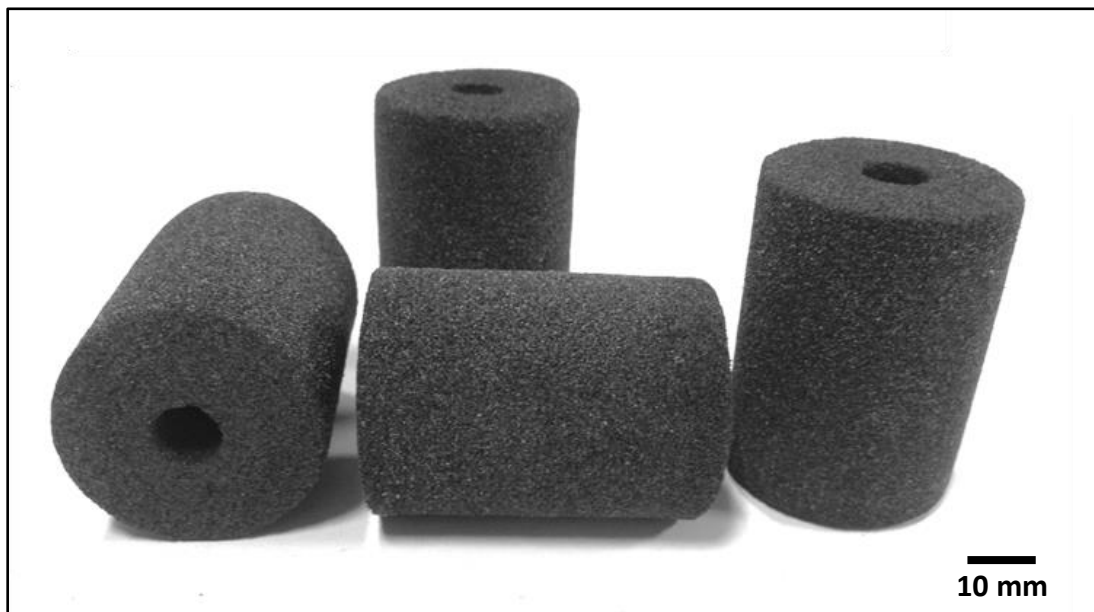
3D printed cylinder-shaped filters using laser sintering
